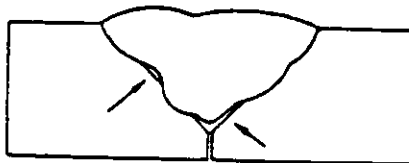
Incomplete fusion in a groove weld
